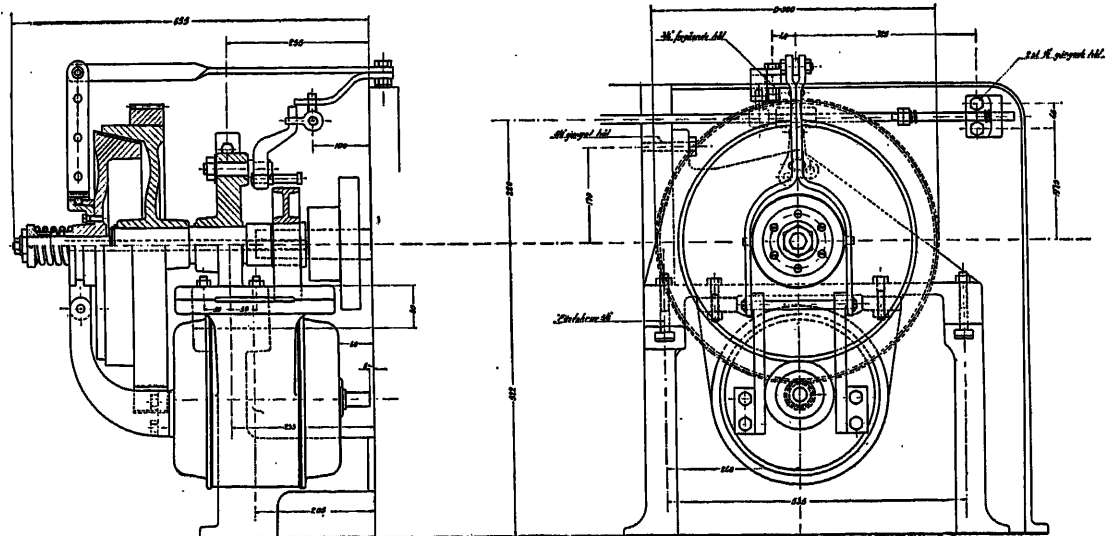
Arrangement for individual drive of heavy loom. Gear drive.
